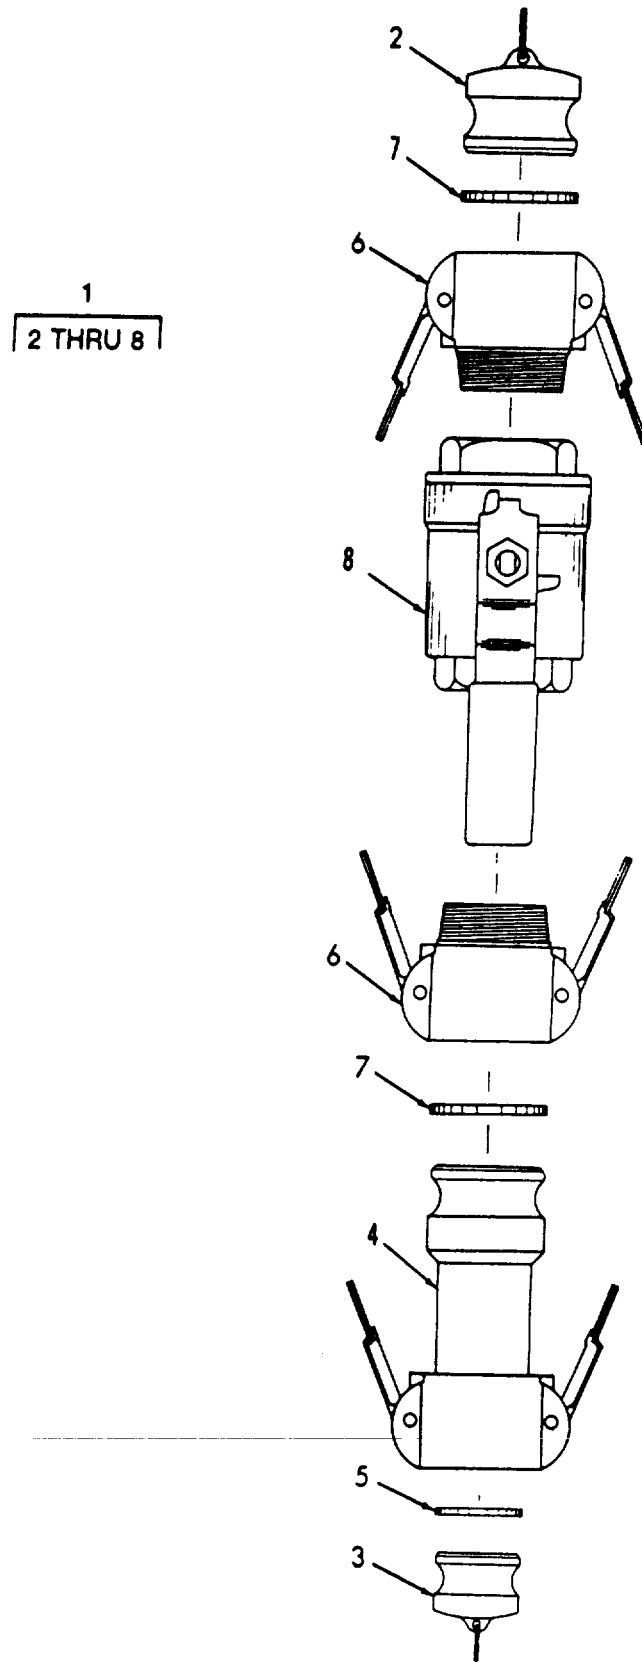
Valve Assembly, 4.00 in., Quick Acting.
